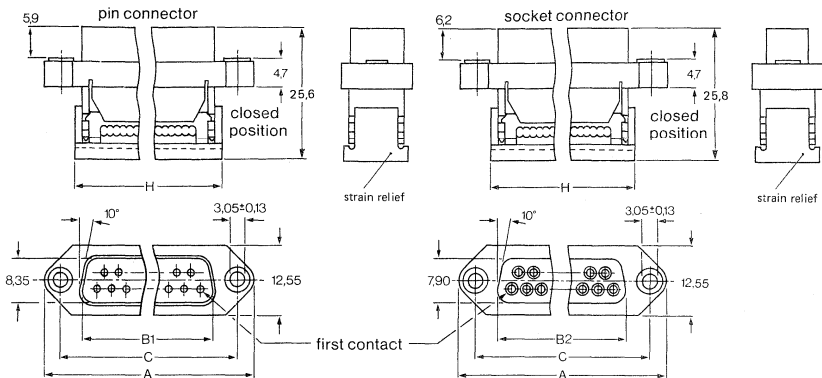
Pin and socket connector, all plastic version. See Table 3 for dimensions A, B1, B2, C and H.
